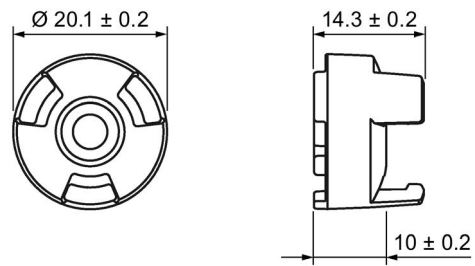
Dimension drawing of spacer 6GT2690-0AG00
